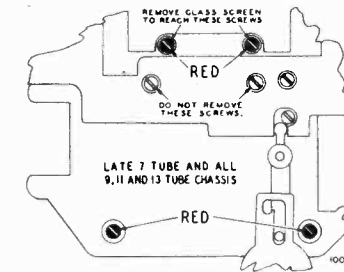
Location of 4 Red Mounting Screws in Late Models
